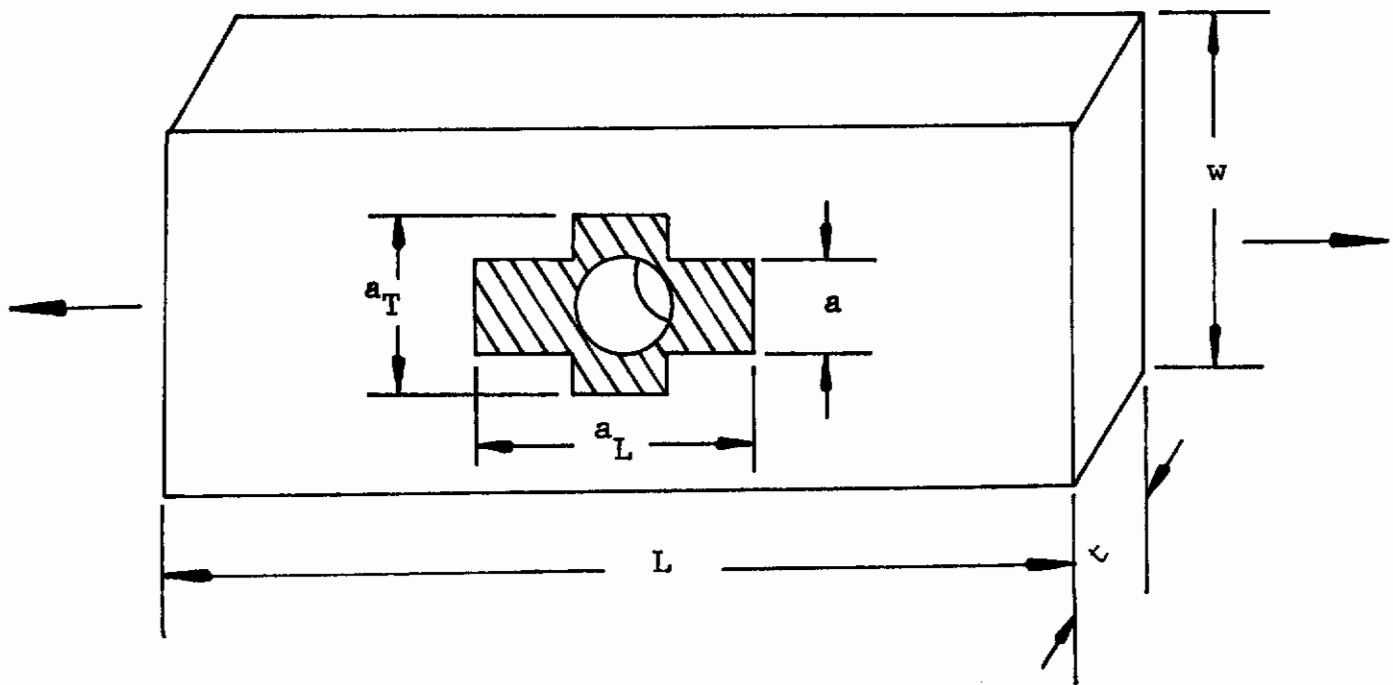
RECTANGULAR EQUIVALENTS OF CIRCULAR RIVET HOLES, AFTER KOEGLER AND SCHNITT (6.38)--SINGLE HOLE
